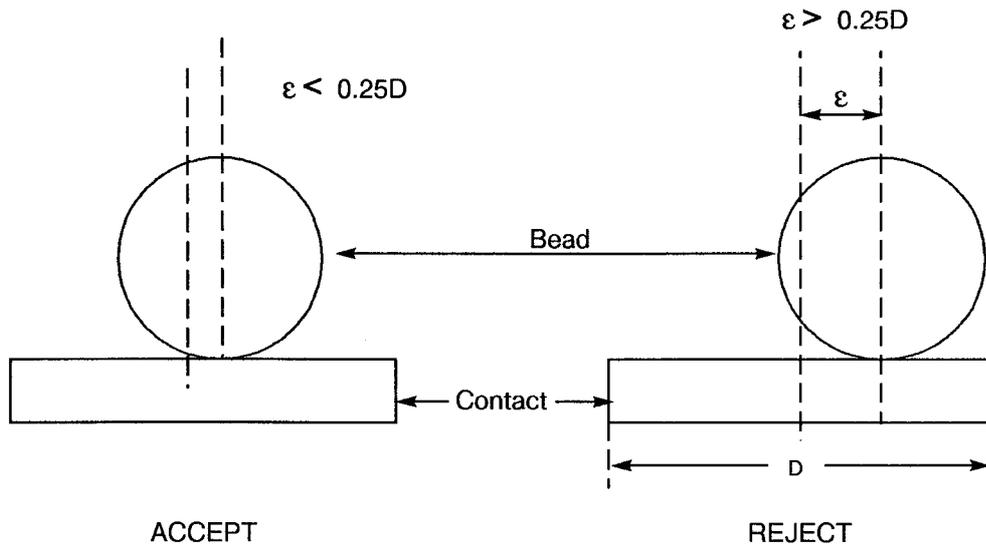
FIGURE X IV - EXAMPLE OF CONTACT ALIGNMENTS
